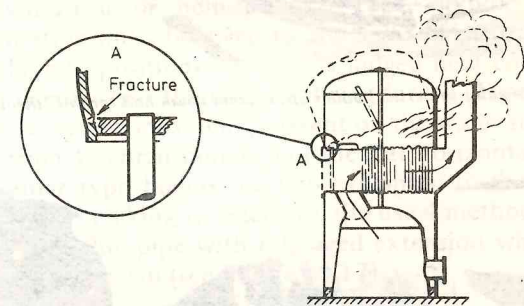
Fatigue cracking of boiler shell at tube plate connection
